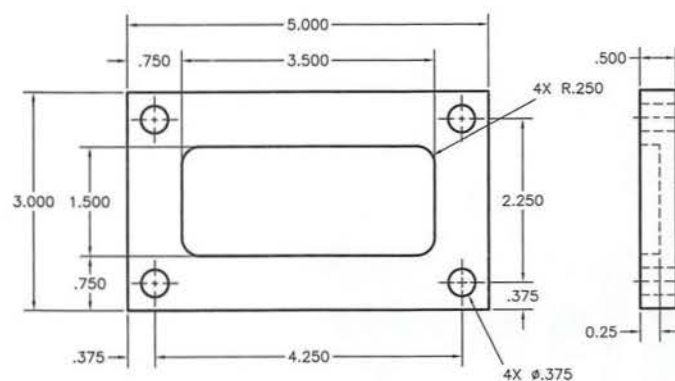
shows a part drawing that can be used to demonstrate how CNC programs are planned. After examining the print, the programmer determines the condition and dimensions of the stock to be used in the process. In this example, the plate to be machined is 6061 aluminum that has already been machined to the length, width, and thickness of the finished part.
